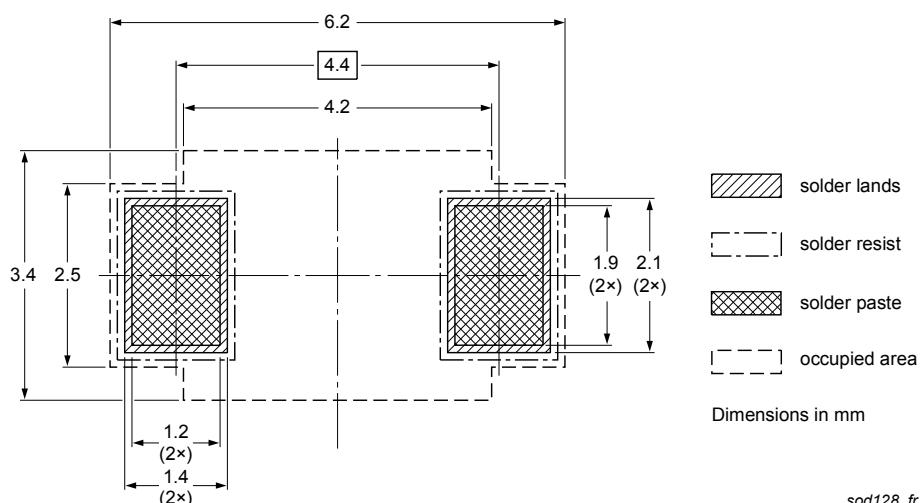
Reflow soldering footprint for CFP5 (SOD128)
